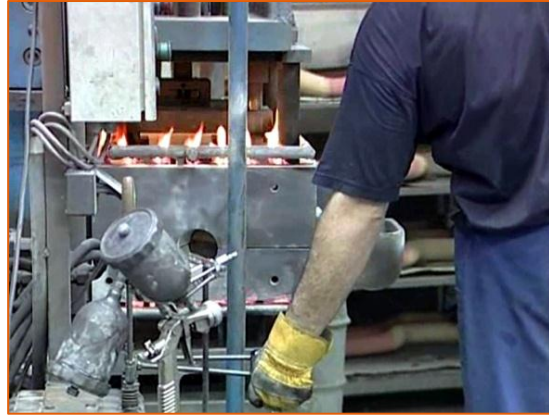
SMELTING INTO THE CASTING MOULDS II.
